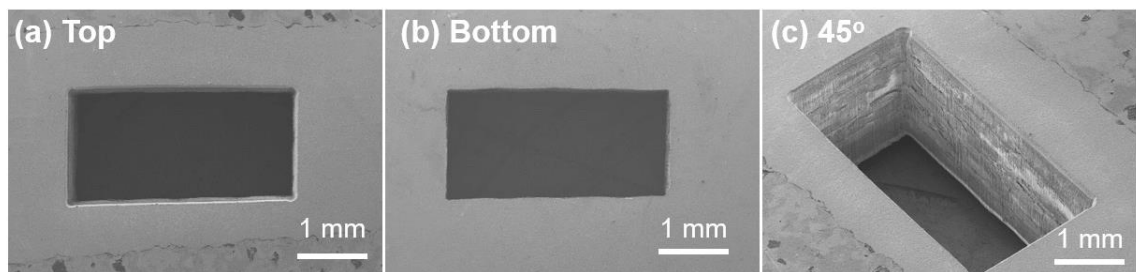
SEM images of a hole drilled using optimized parameters: (a) top, (b) bottom, and (c) 45° view.
